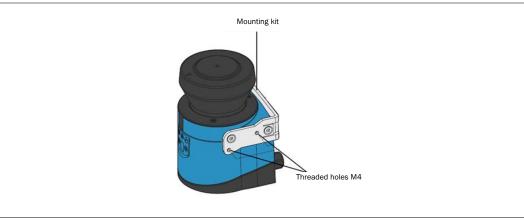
Assembly drawing of the mounting kit for the LMS1xx laser scanner
